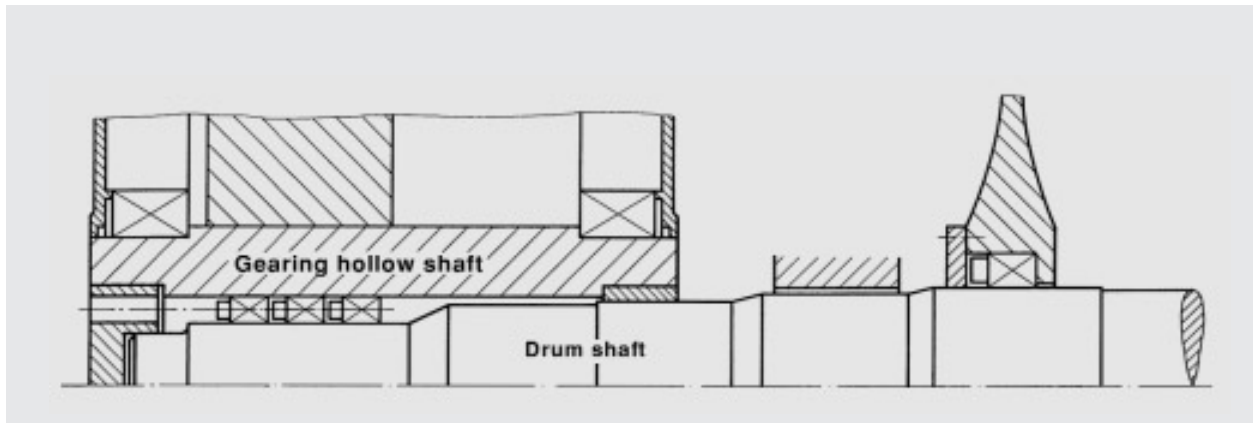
· Shaft-mounted gearing secured using 3 Locking Assemblies RfN 7012.
